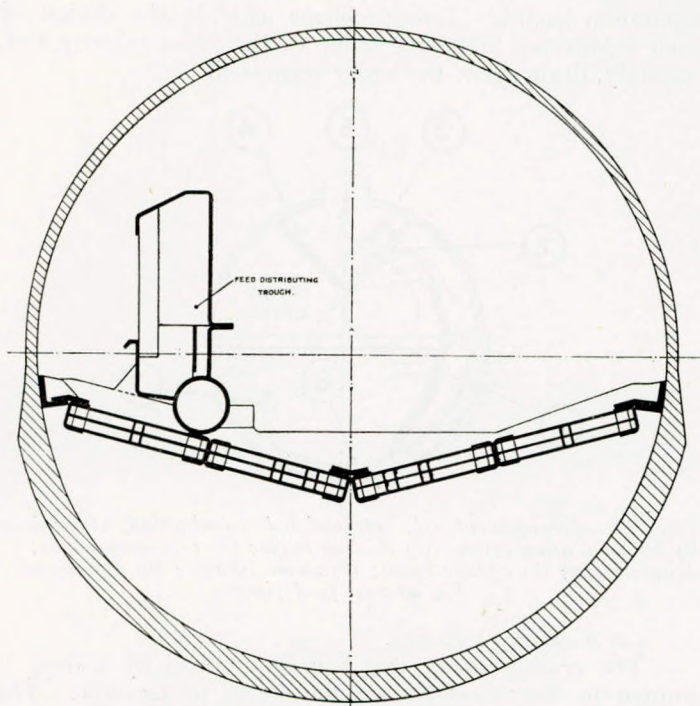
Arrangement of perforated plate baffles in Foster Wheeler controlled superheat boiler.
